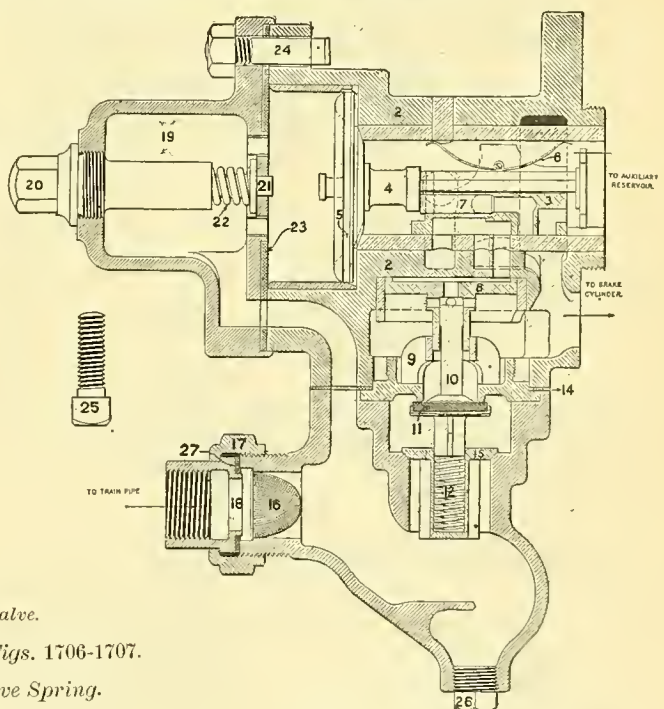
Sectional View of Special Quick Acting Passenger Triple-valve.
